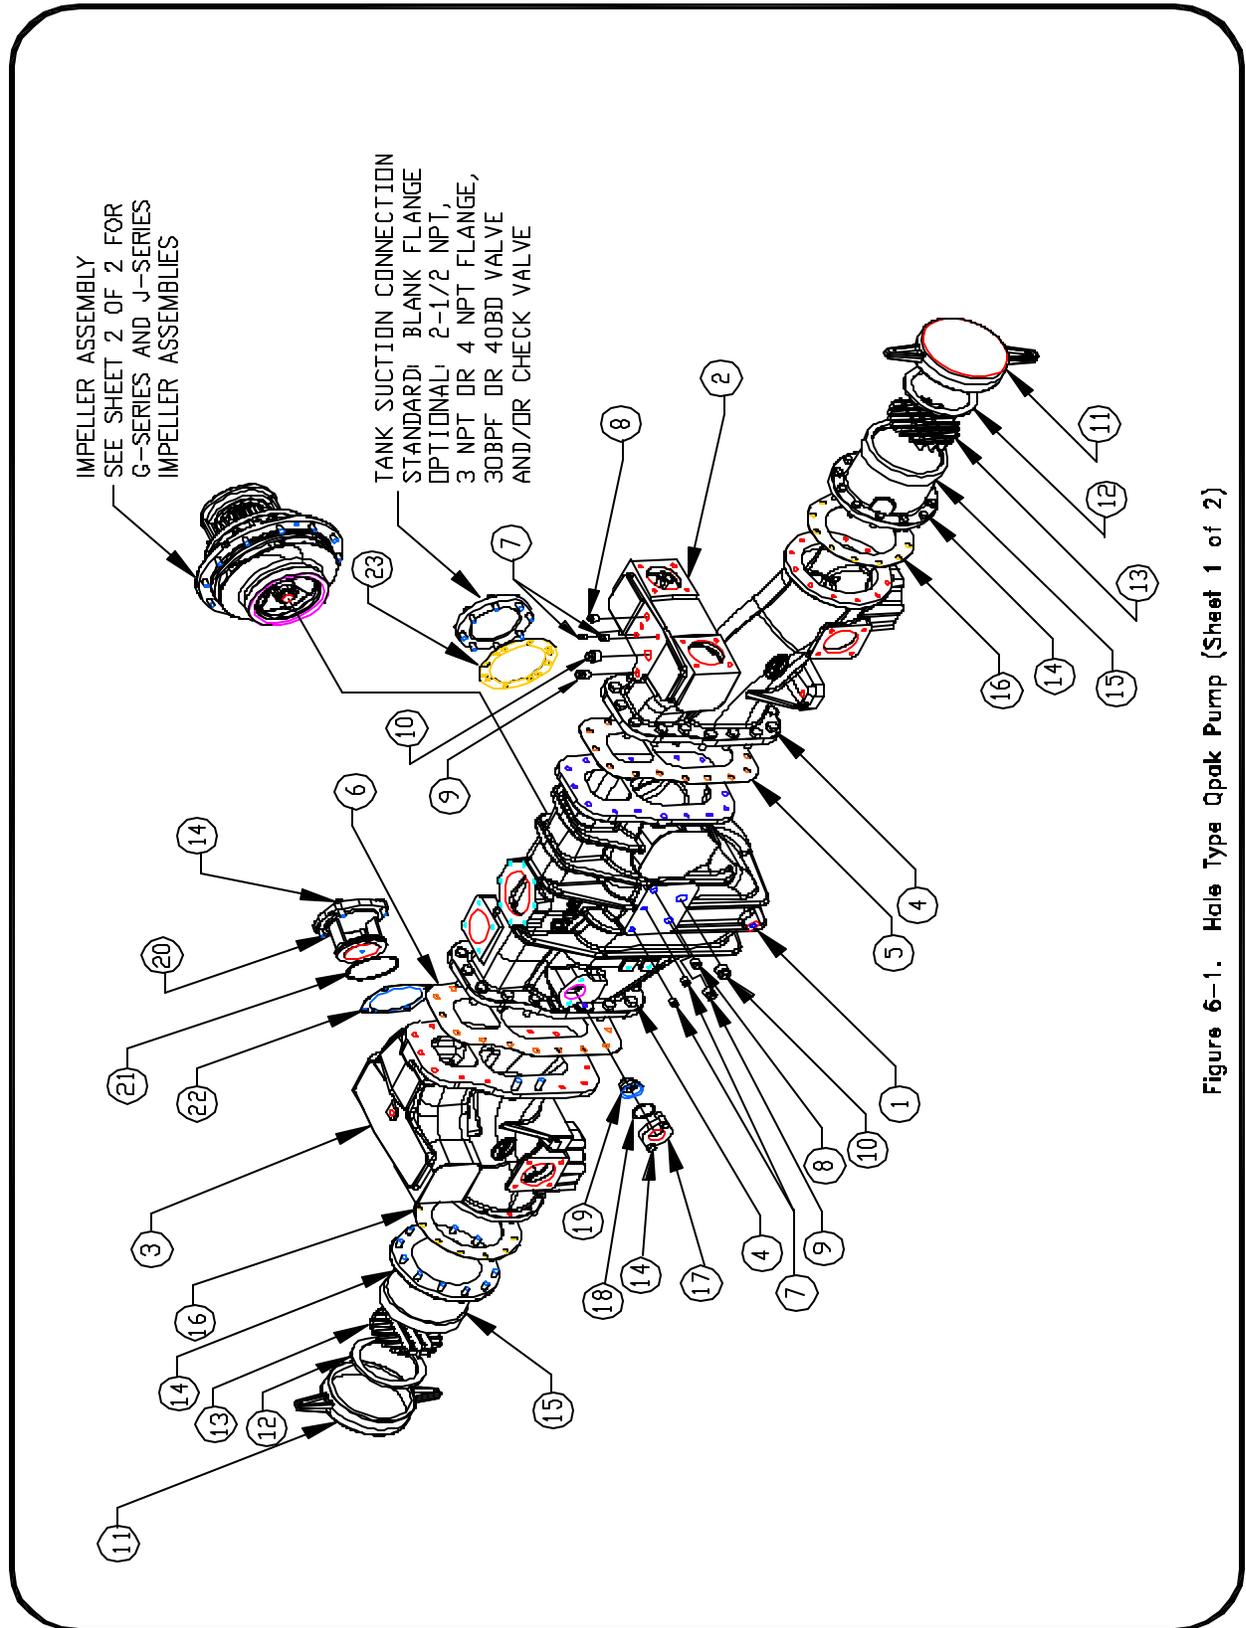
Hale Type Qpak Pump (Sheet 1 of 2)
